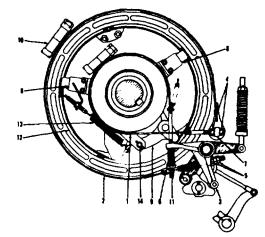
Boom hoist clutch and brake band removal and installations.
